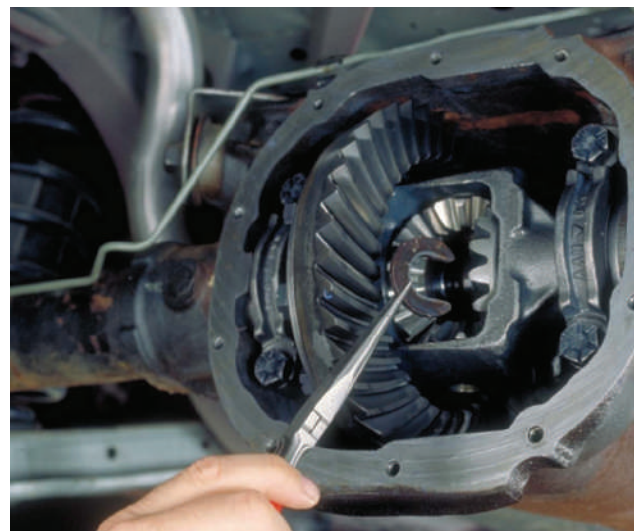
To remove the axle shafts from the differential in an integral housing, a C-lock must normally be removed.
